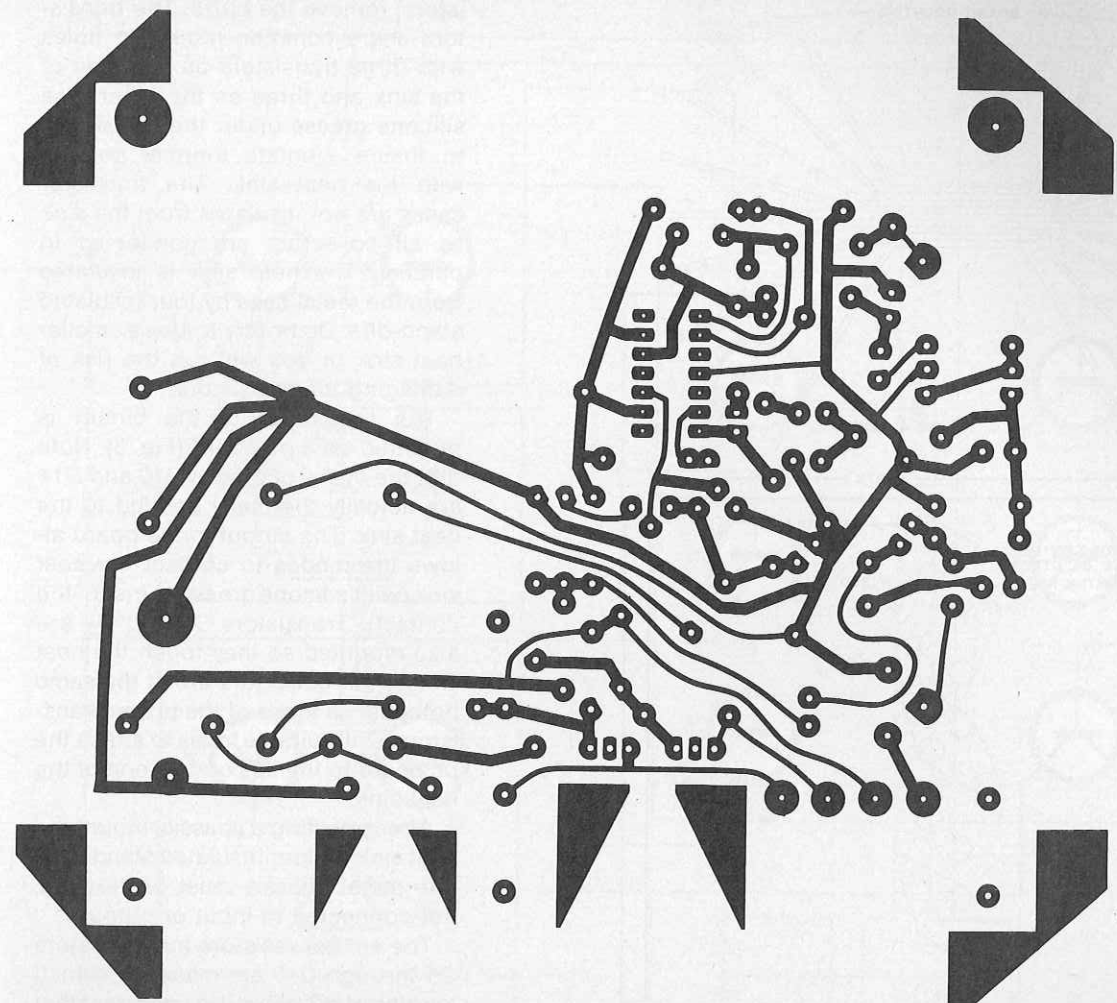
Etching and drilling guide and component layout for pc board. D10, D11, Q3, and Q4 touch heat sink.
